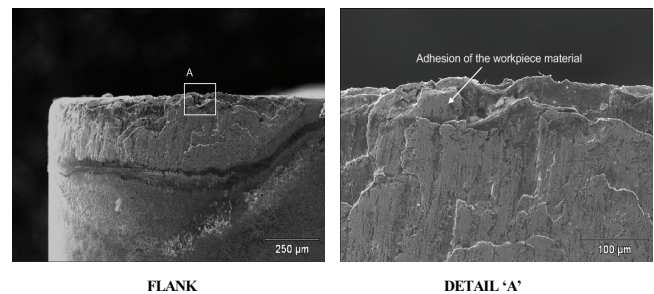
Flank wear land of the cutting edge used to cut L1 alloy at the end of tool life $v_c = 160$ m/min.
